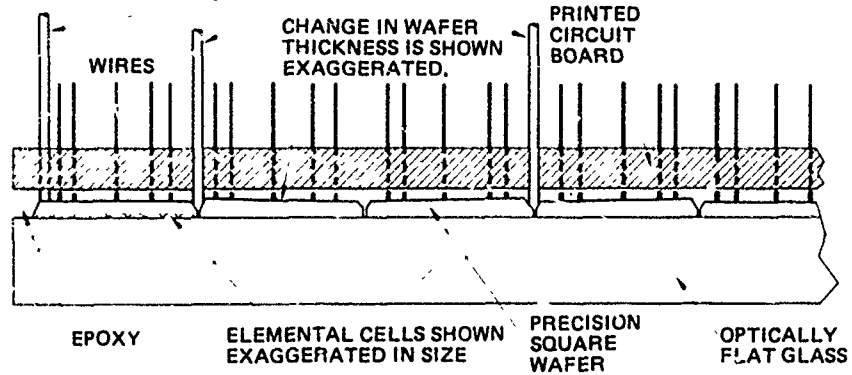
Wrap-around conductor technique for self-contained module (side view after assembly).
